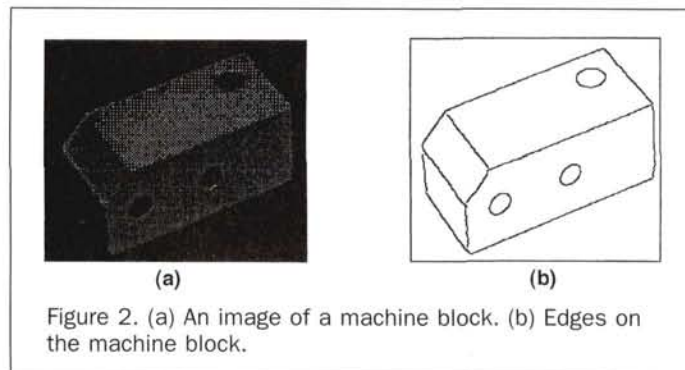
(a) An image of a machine block. (b) Edges on the machine block.
